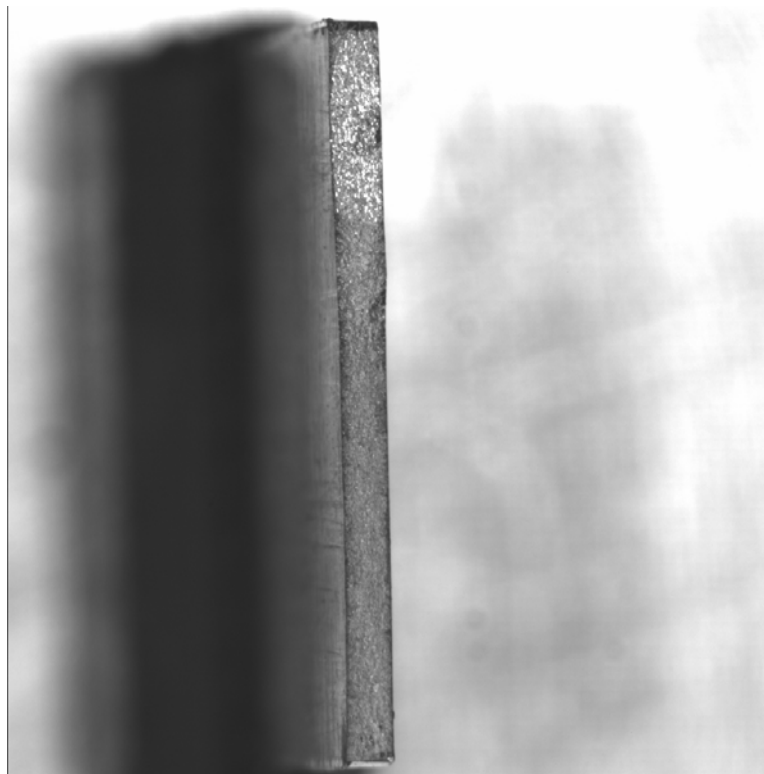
Fracture Surface of Specimen 5925.
